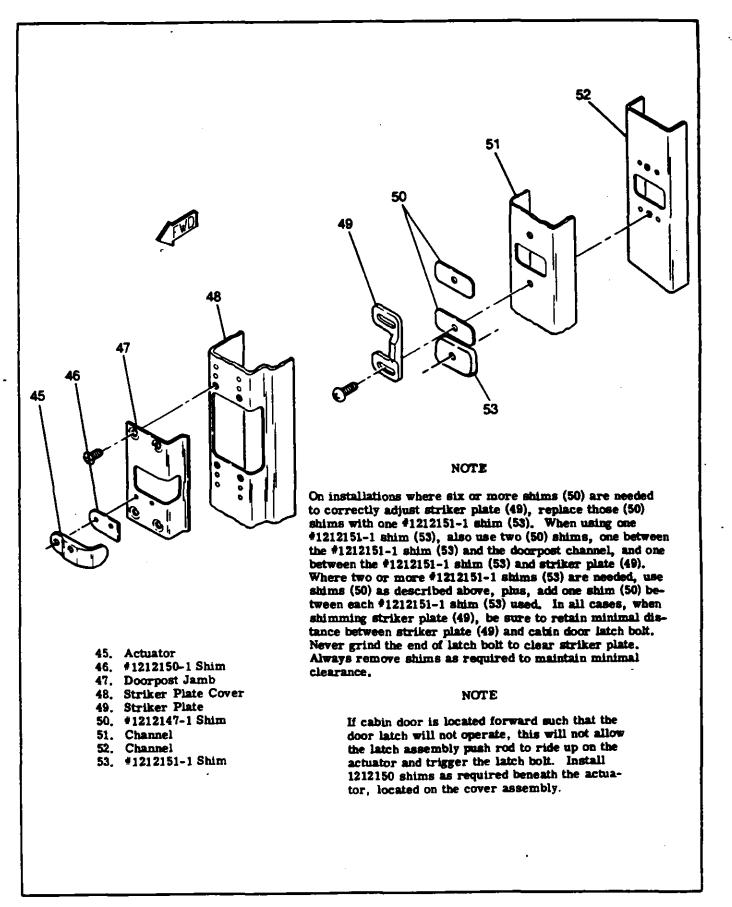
Cabin Door Latch Installation (Sheet 4 of 4)
